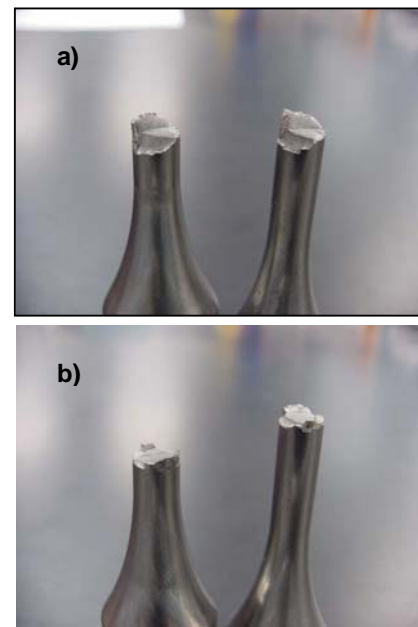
Appearance of WC-17Co AC-HVAF coating after failure of AISI 4340 fatigue specimens. Test
